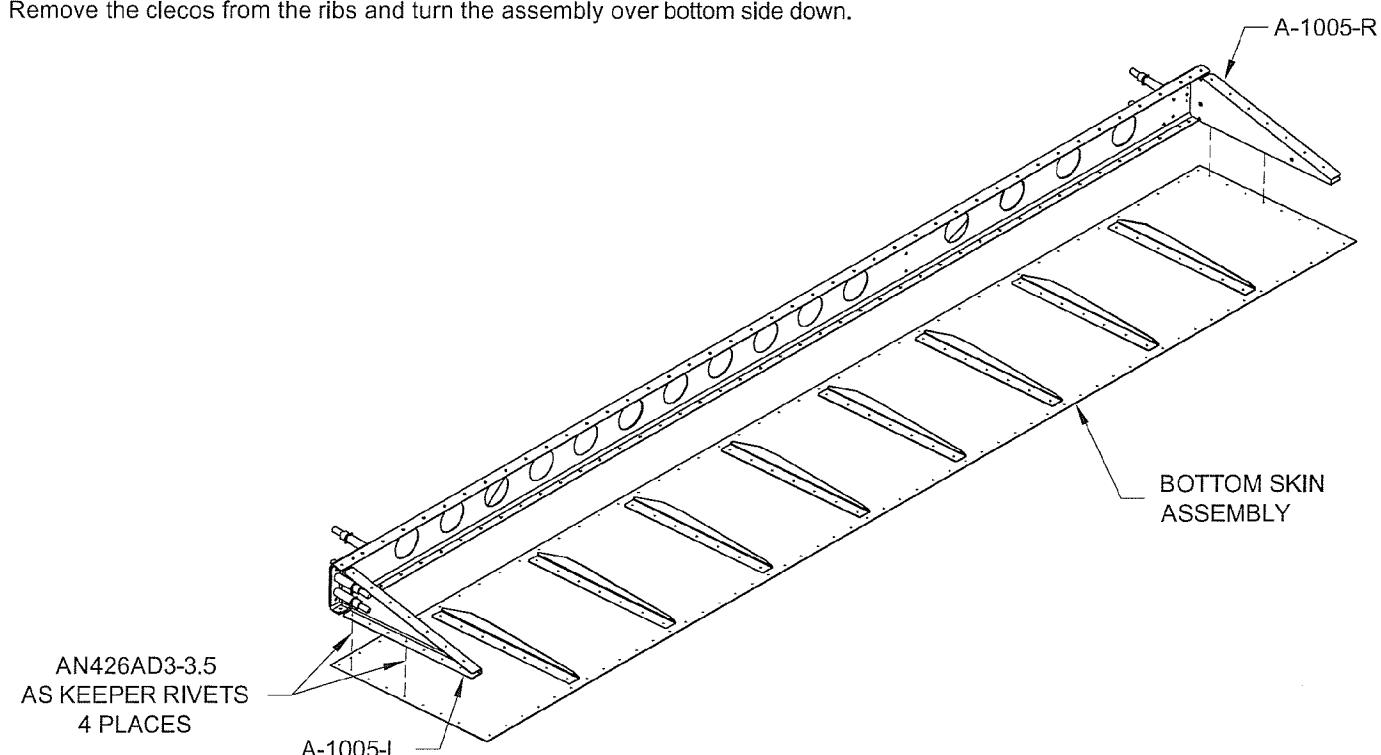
TEMPORARY ATTACHMENT OF THE BOTTOM SKIN ASSEMBLY
